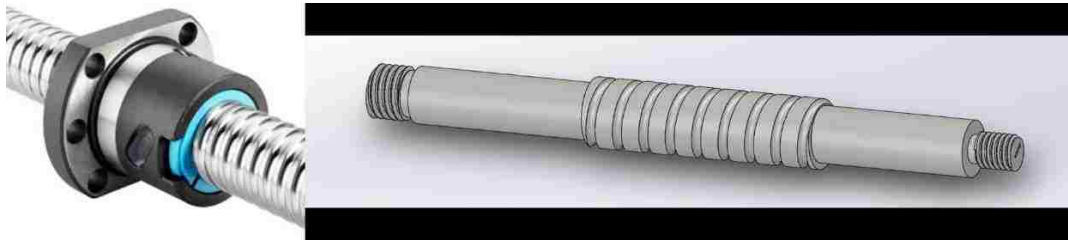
A photo of Thompson linear ball screw and ball nut, along with SolidWorks model of a ball screw [33].
